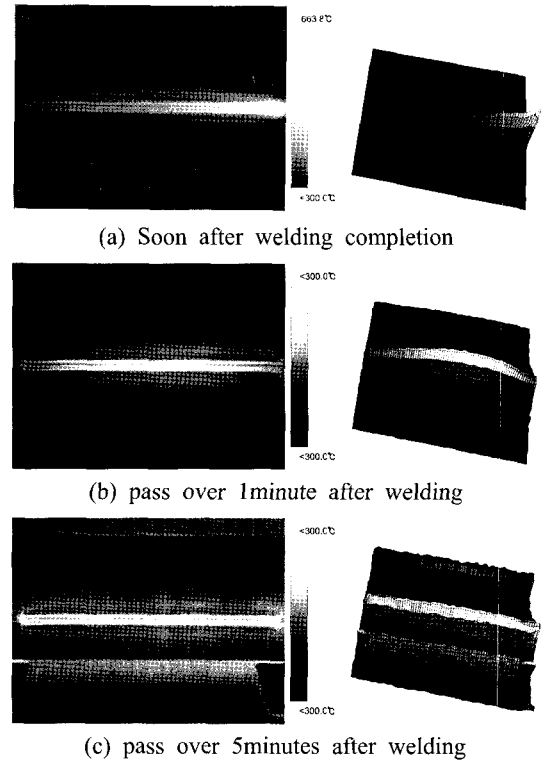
Photo and 3D image of infrared rays observation in CW laser fillet welding
